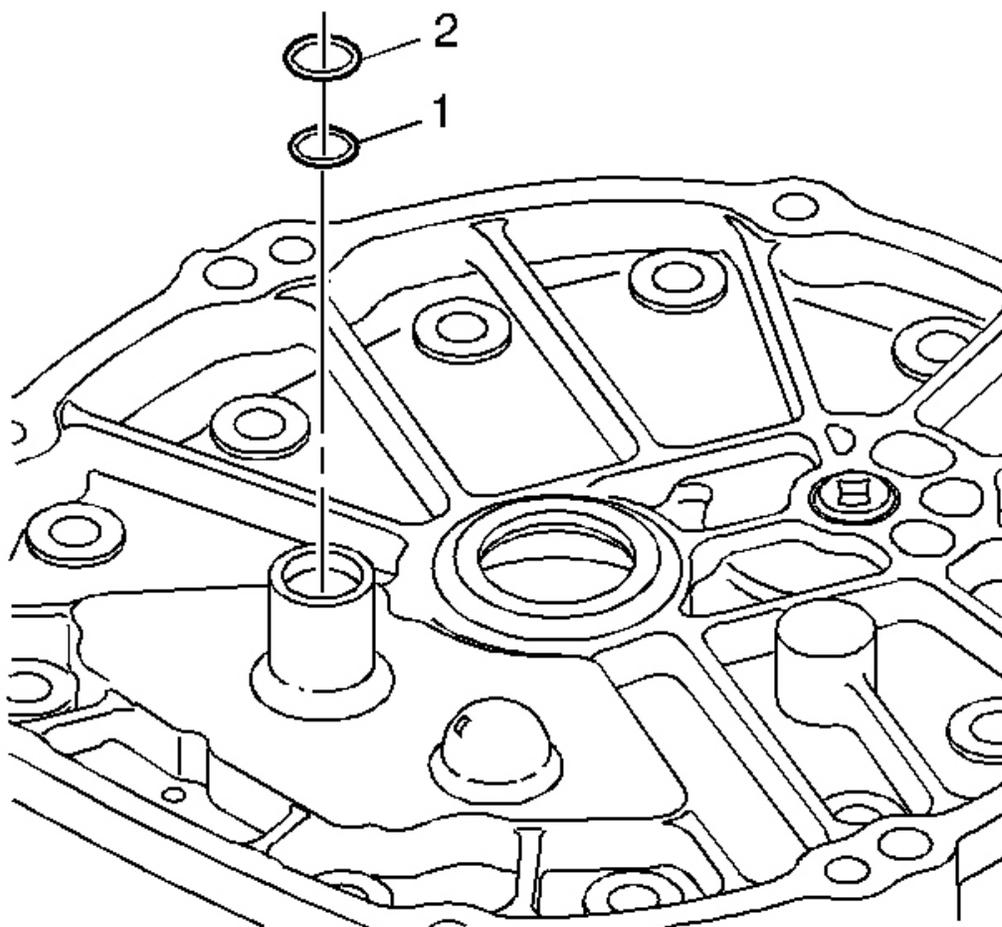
Installing/Removing Inner Shift Rail Seal & Outer Shift Rail Seal
